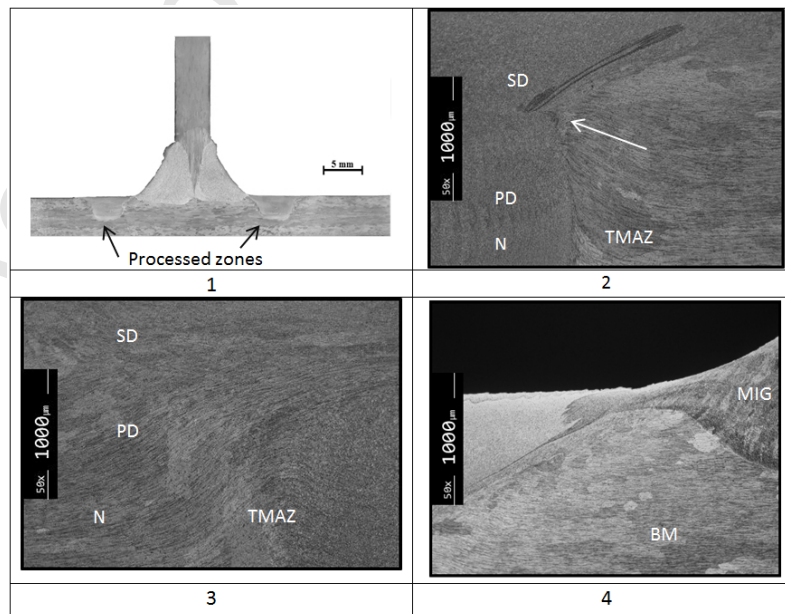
MIG weld made on AA 6082-T651 and processed with Tool B; 1) Macrograph; 2) Advancing side of stir zone; 3) Retreating side of stir zone; 4) Toe region. N – Nugget; TMAZ – Thermomechanically affected zone; PD – pin driven flow; SD – shoulder driven flow.
